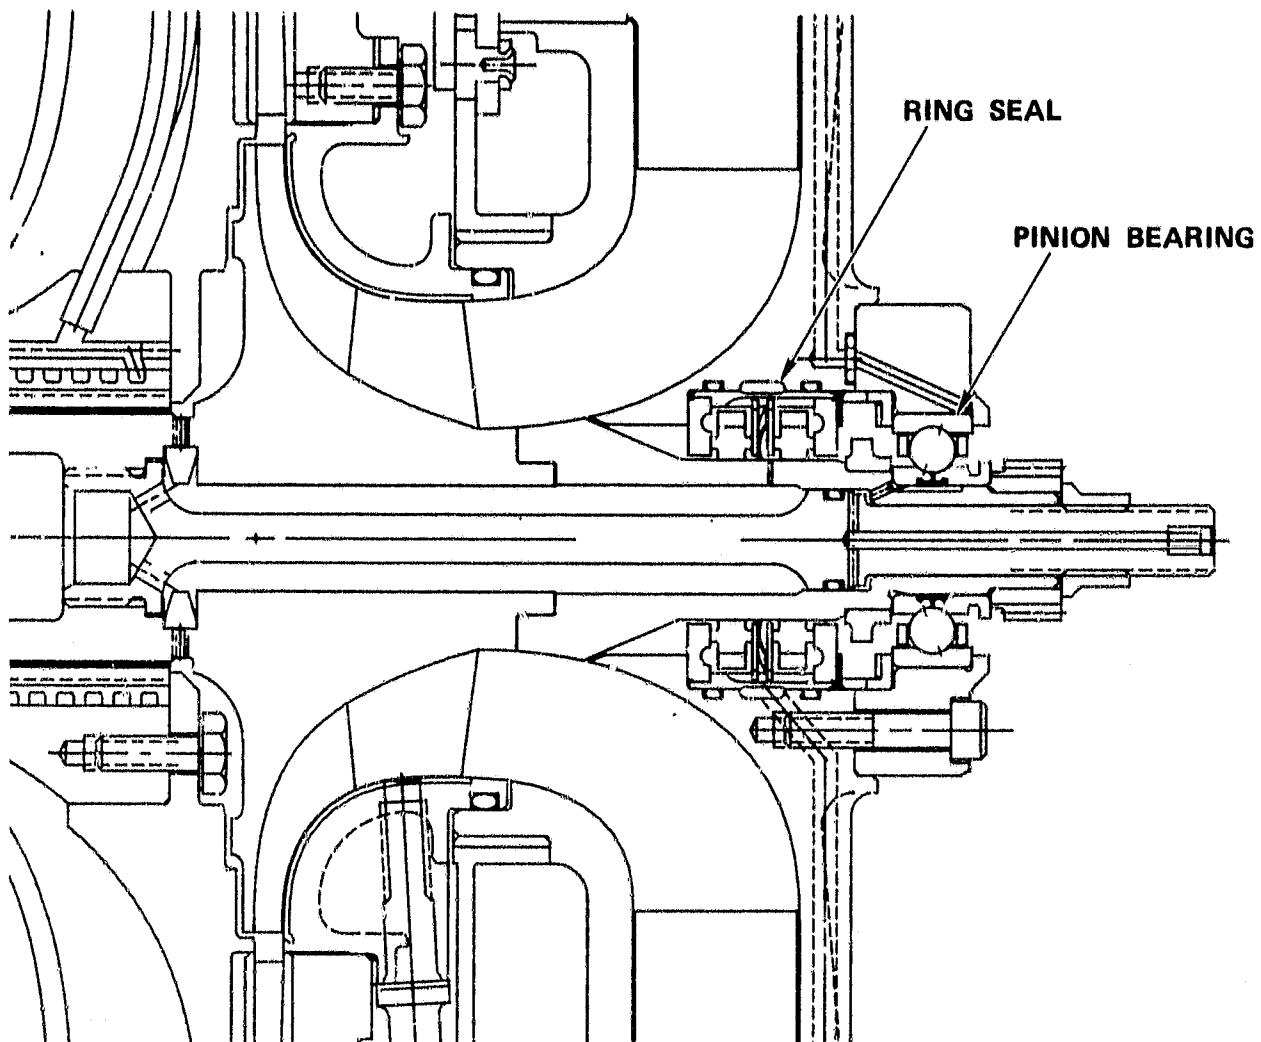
High Speed Pinion Bearing and Rotor Ring Seals.
